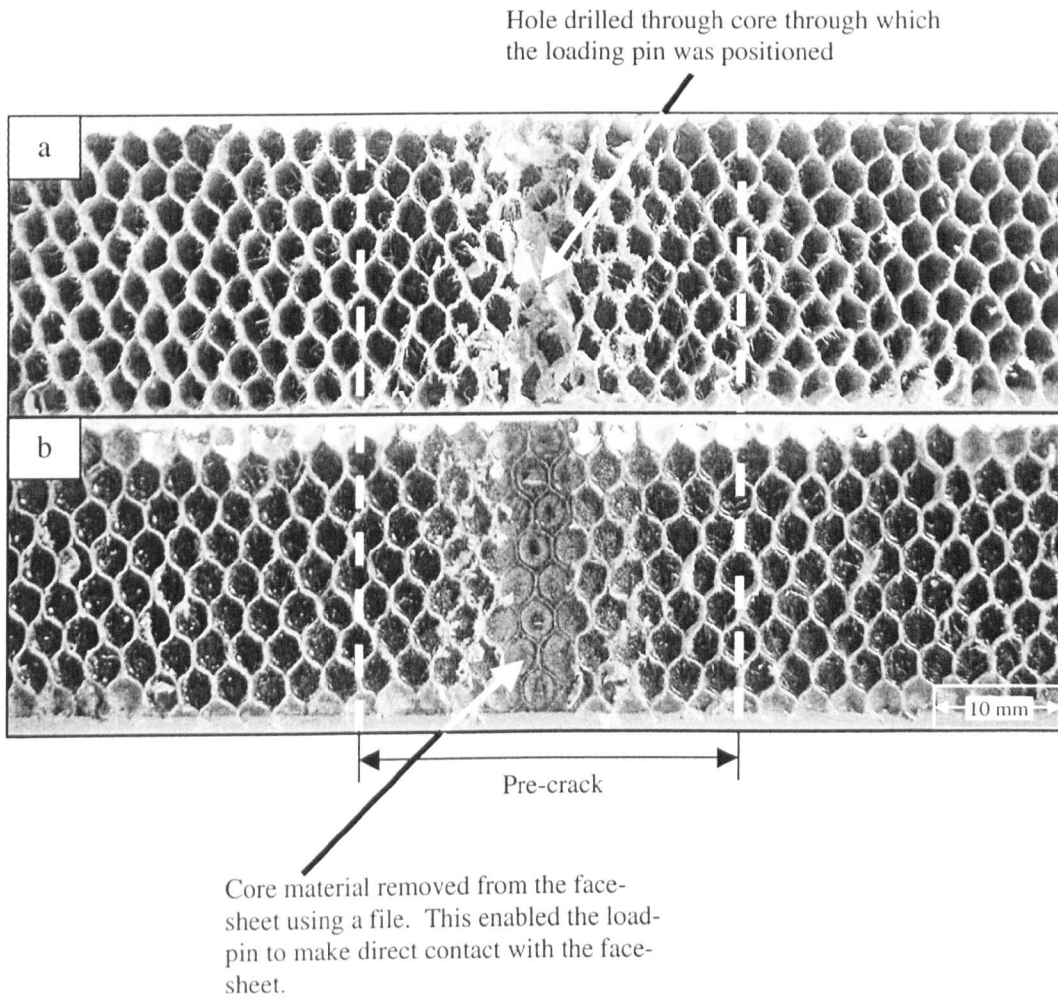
Fracture surfaces of a CNFS specimen from Structure A, (a) core surface, (b) face-sheet surface.
